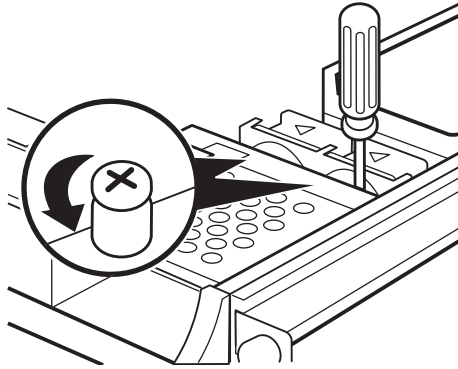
Loosening the SAS IF Assembly Screws
